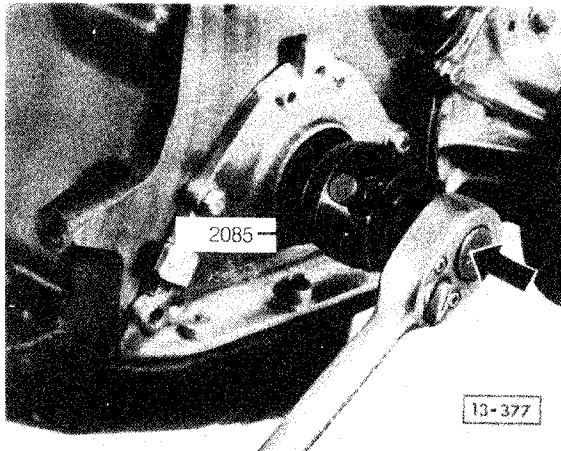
Crankshaft front oil seal being removed using Volkswagen special tool no. 2085. Rotate tool clockwise to remove seal.
